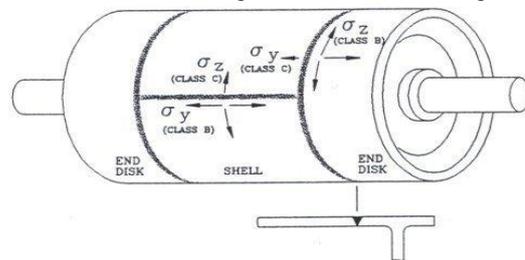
Circumferential and Axial Weld Classifications(9)
